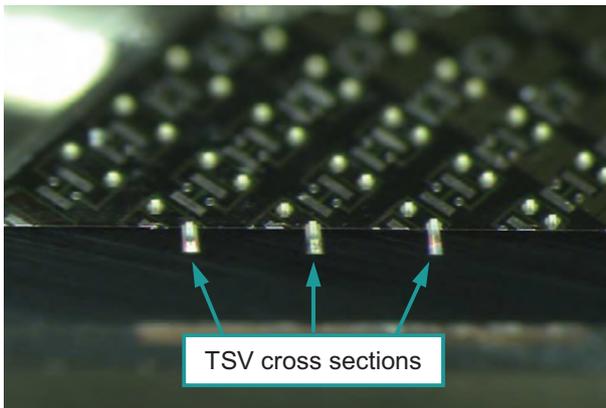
Light-optical image - tilted view of cross sectioned TSV specimens directly after target preparation by mechanical grinding
